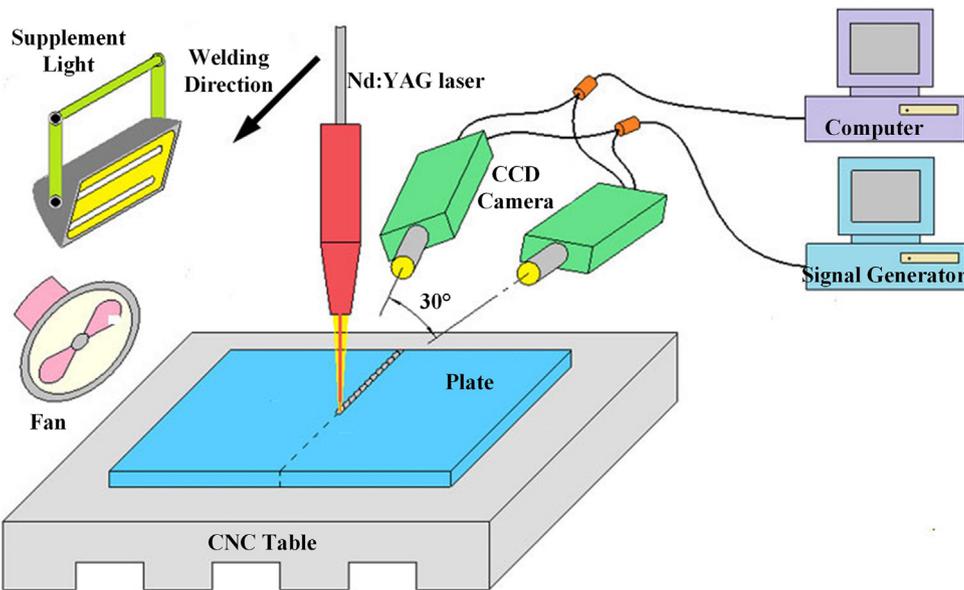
Schematic of digital image correlation technique measuring the deformation process during in-air laser welding.
